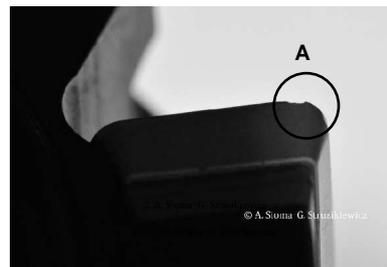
Photograph of the edge of a cutting insert with visible chipping
